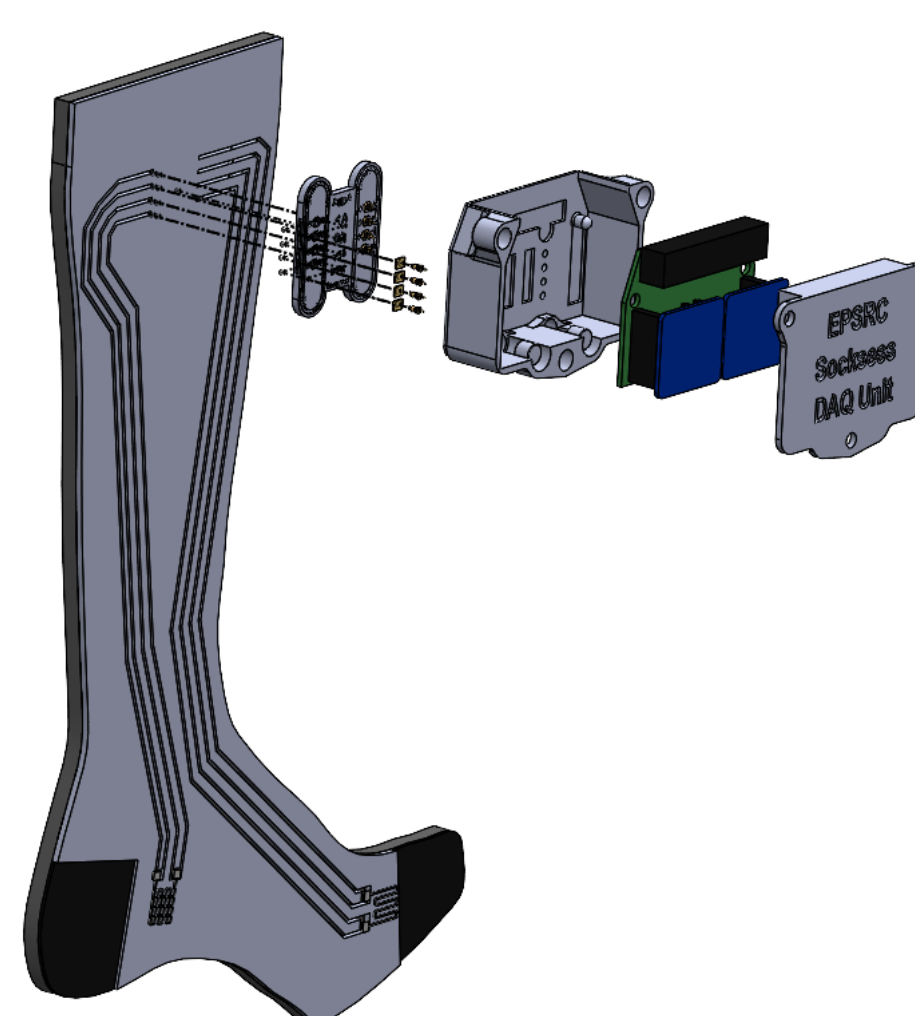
Exploded diagram showing sensor placement, embroidered conductive yarn paths and custom electronic connector components.
